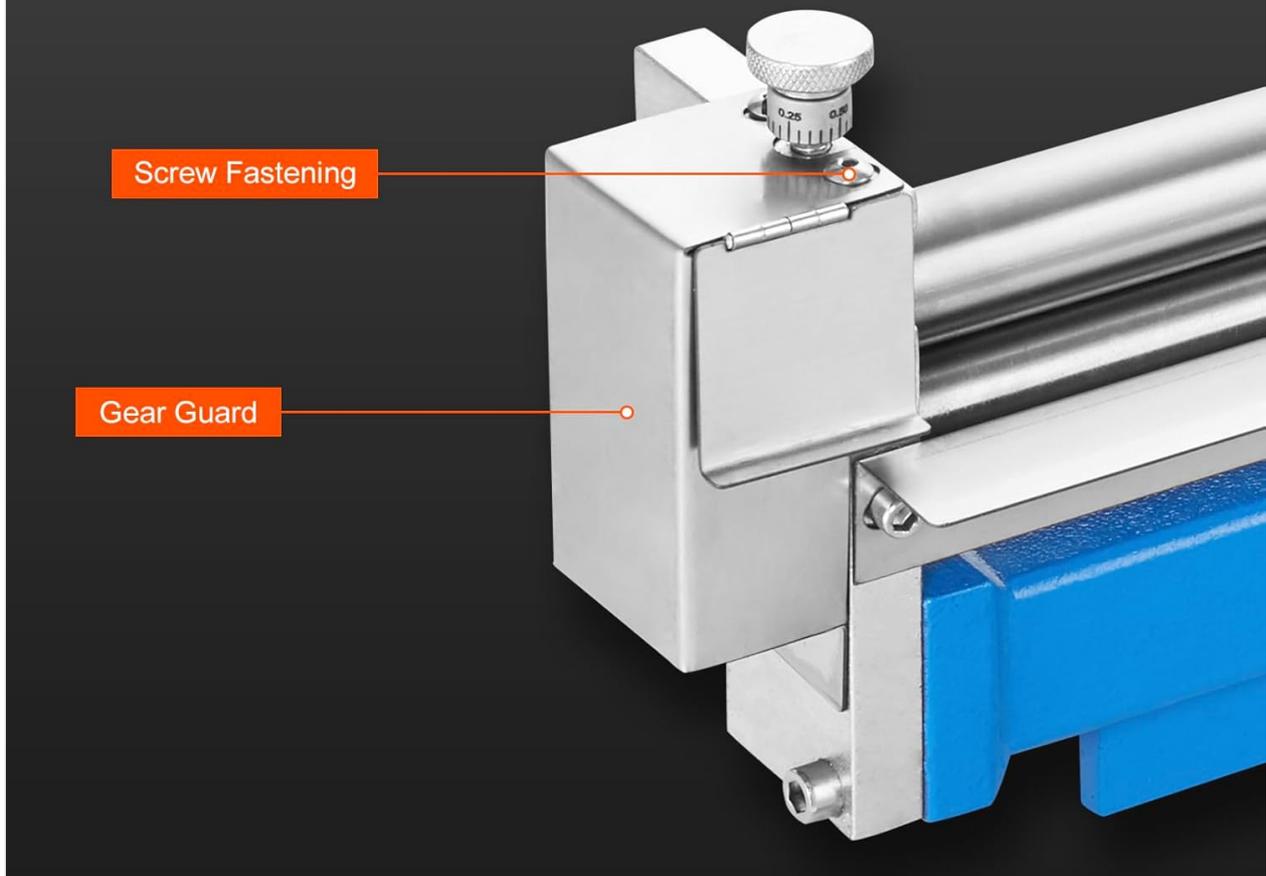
View of the built-in stainless steel gear guard for safety and durability.
